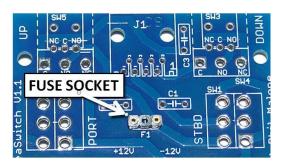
Fuse Socket Installed at the Location Labeled F1
